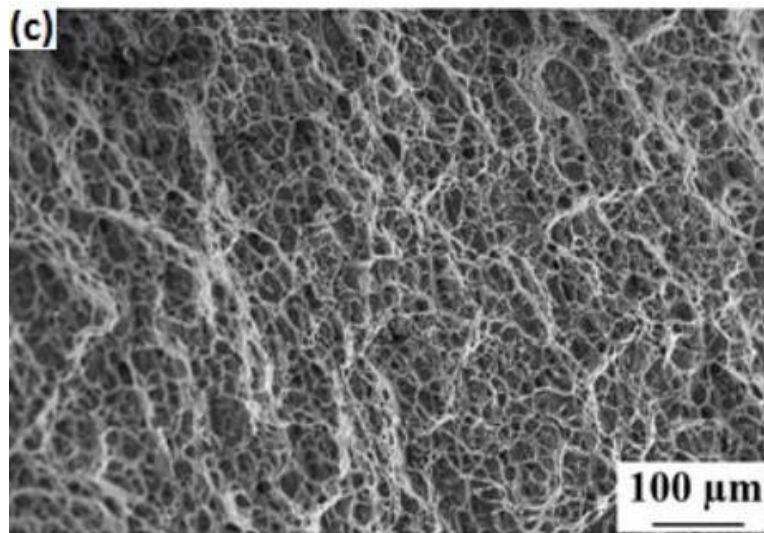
Fractured surface morphology of FSPed specimen no-10
